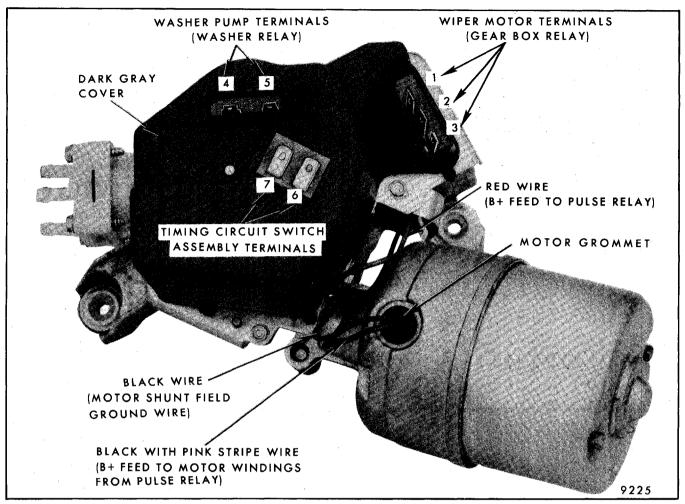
Modified Pulse Wiper Motor and Pump Assembly
